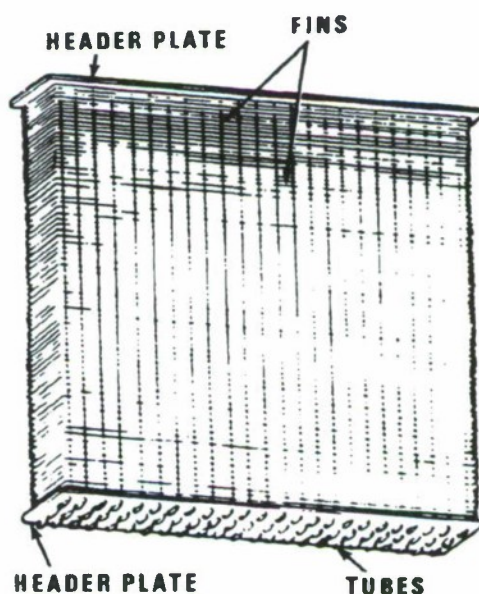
Typical Radiator Core (Flattened Tubes) (Ref. 17)
